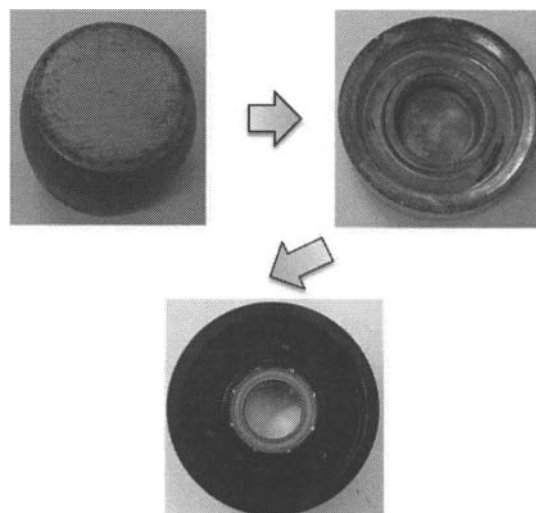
Fabrication of automotive engine pulley with magnesium billets.
